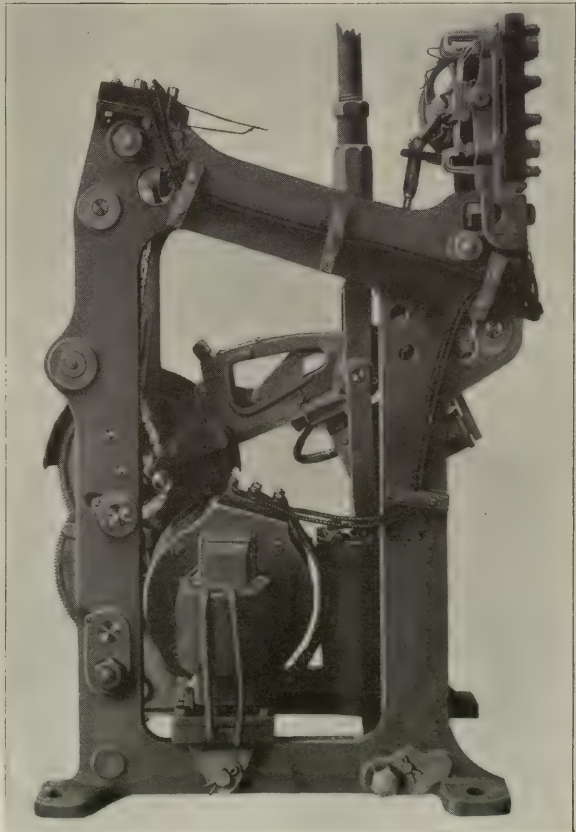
Union Style "S" A. C. Motor Mechanism.
